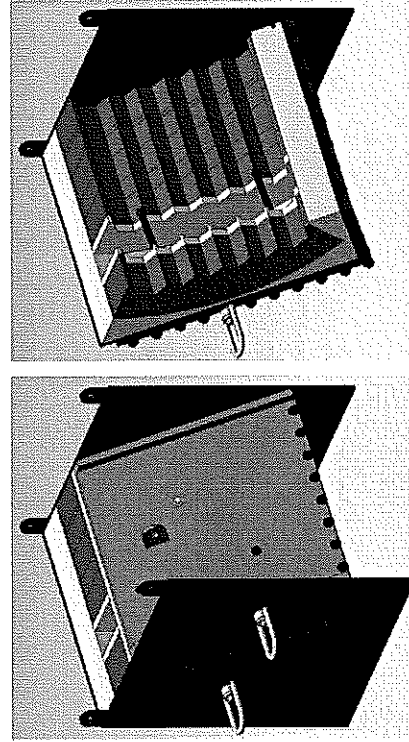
RENDER OF THE PSR MOLD IN THE "INSTRUMENT PATH CORE OUTER REFLECTOR" CONFIGURATION: FULL ASSEMBLY (LEFT) AND FRAME WALL, MOLD CAP, AND INSIDE PLATE REMOVED FOR CLARITY (RIGHT).
